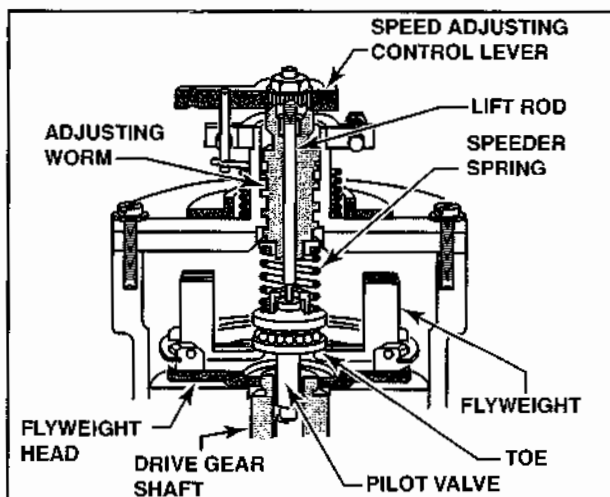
The flyweight assembly in a typical propeller governor consists of a set of flyweights that are mounted to a flyweight head, which is driven by the governor drive shaft. The pilot valve extends up through the drive shaft and rests on the toe of each flyweight so that when the flyweights move, the pilot valve also moves. To enable the operator to select a blade angle, a speeder spring adjusts the amount of force acting on the flyweights and pilot valve.
